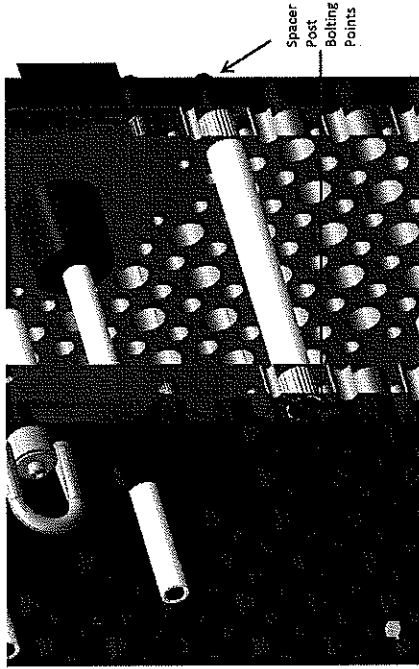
DETAIL OF THE SPACER POST COMPONENTS ENGAGING THE FRONT AND BACK PLATES.
